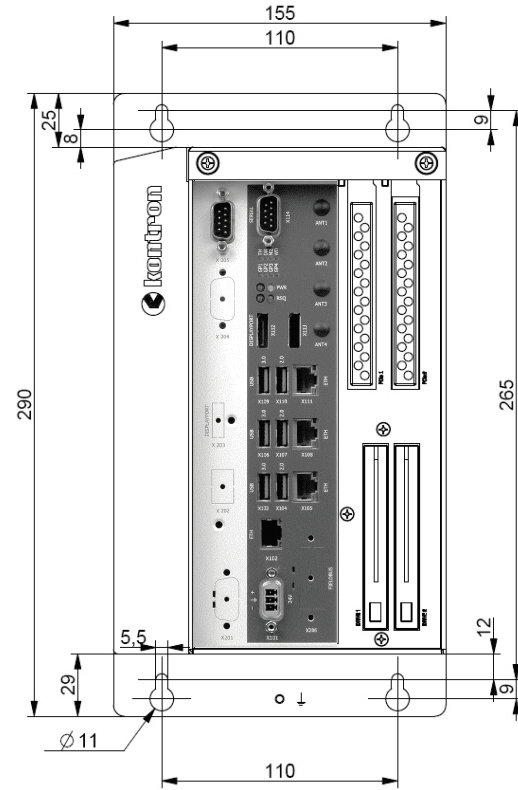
Dimensions: detail key hole (KBox C-104-TGL-2)
